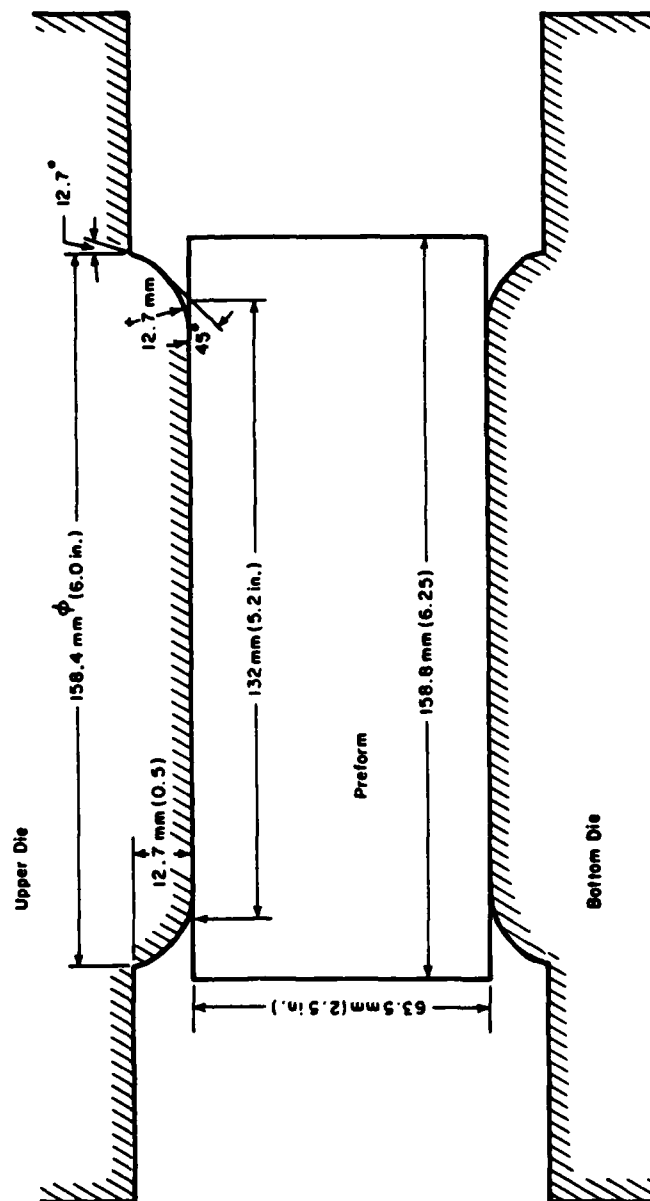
Schematic Drawing of Disk Forging Die and Preform
